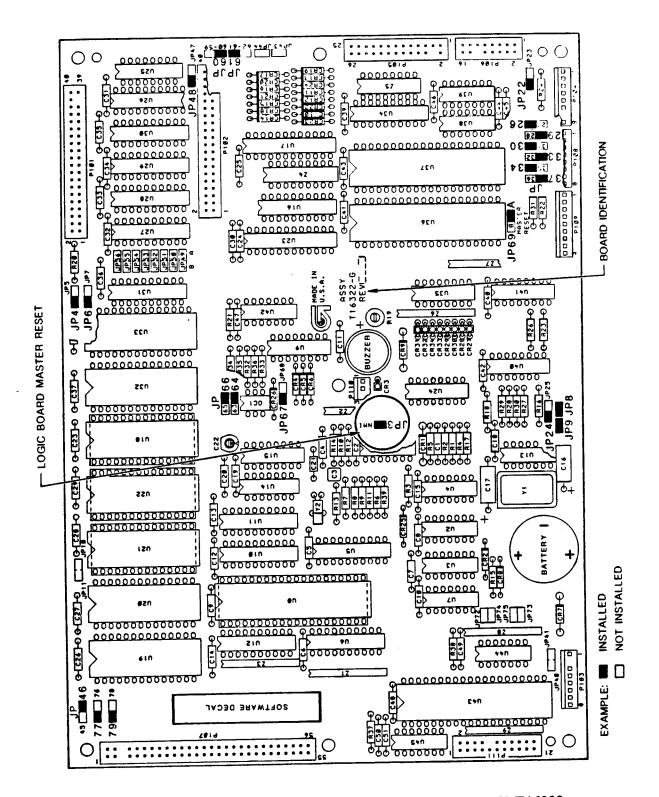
JUMPER SETTINGS FOR PWB ASSEMBLY T16322
